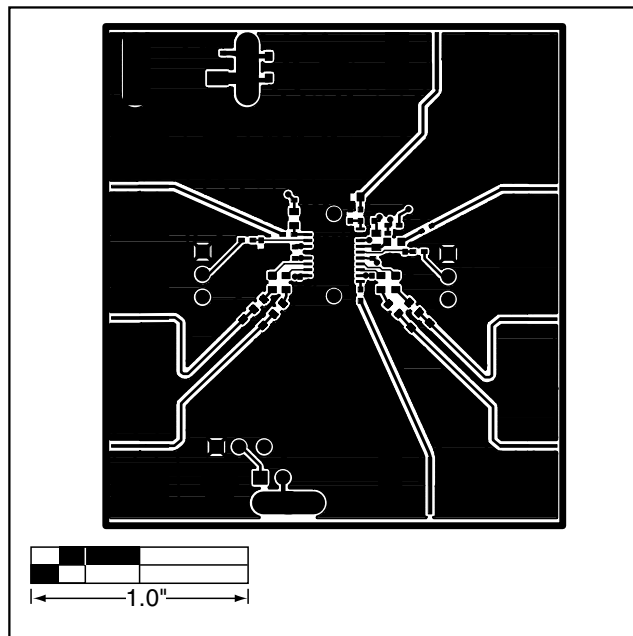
MAX2720/MAX2721 EV Kits PC Board Layout—Component Side (Layer 1, Top)
